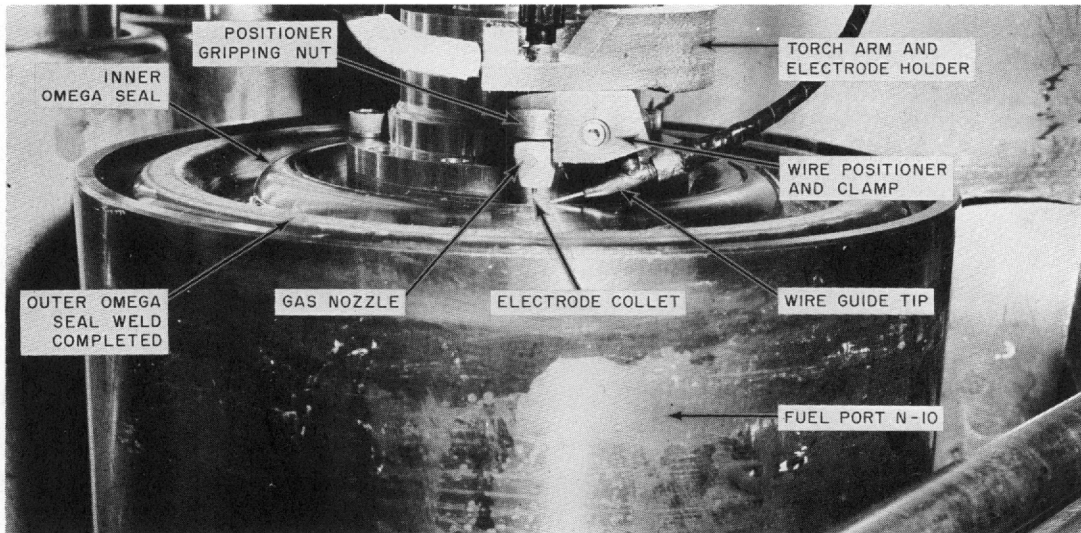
Welding the Inner Omega Seal on Fuel Port N-10.
